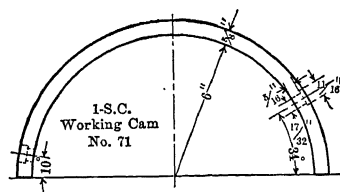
CAM PLATE FORMED TO FIT BLANK CYLINDER
